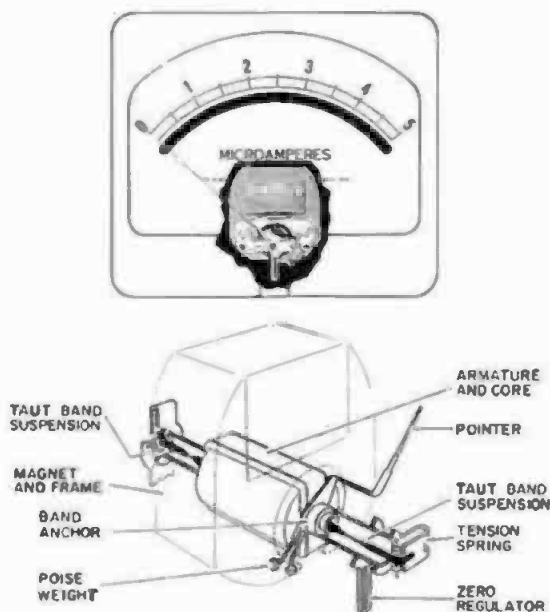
Interior view of a taut-band meter movement, and a cross-sectional view of its construction. (Courtesy, Stark Electronic Instruments, Canada)
